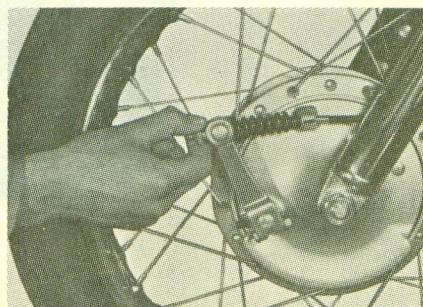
Some models are provided with an adjustment nut as shown at end of front brake cable.
